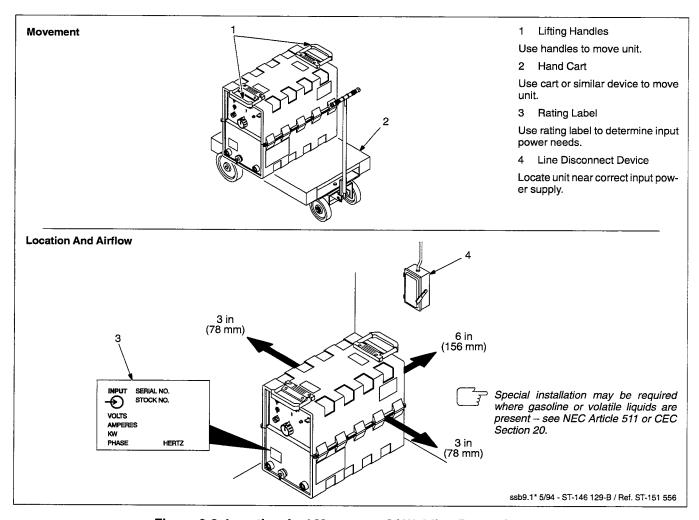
Location And Movement Of Welding Power Source
